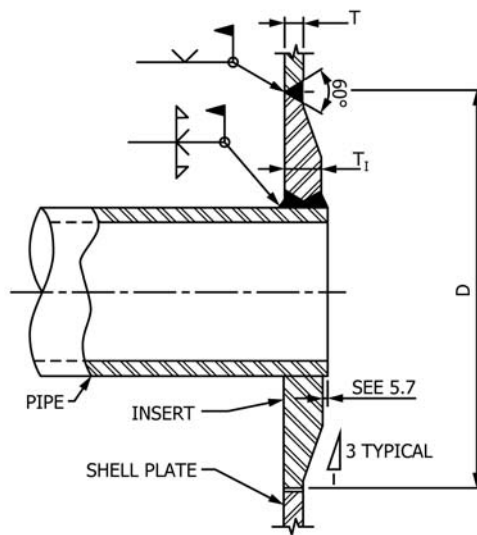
Type III, Class 1 Penetration: Single-Bevel Insert Plate
